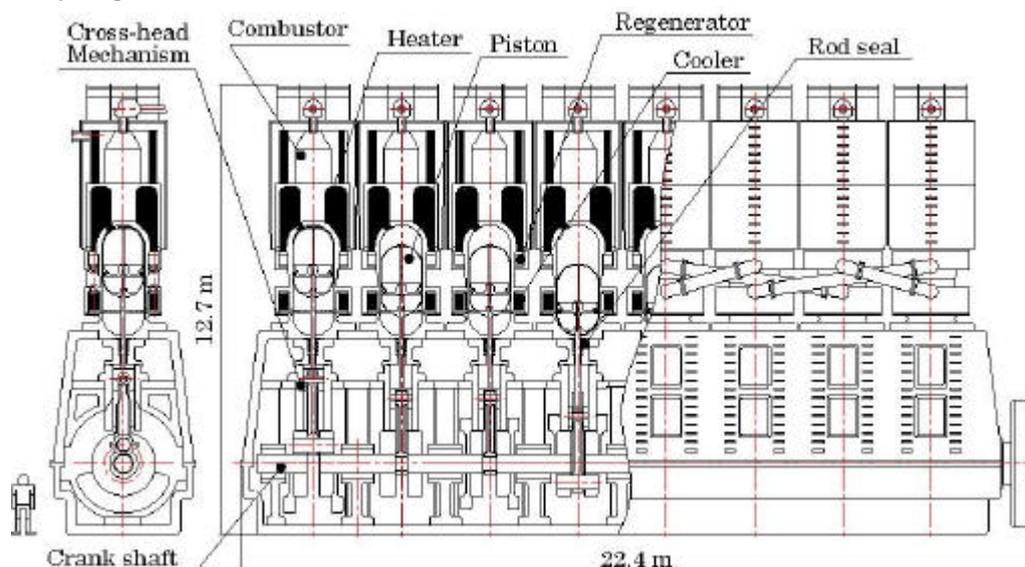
, Conceptual Drawing of the 20,000 kW class Marine Stirling Engine
